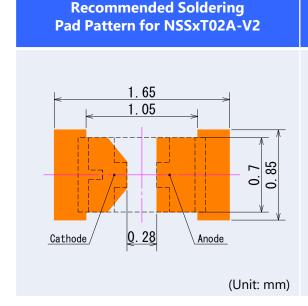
Copper Layer Designs to Create the Soldering Pad Pattern
